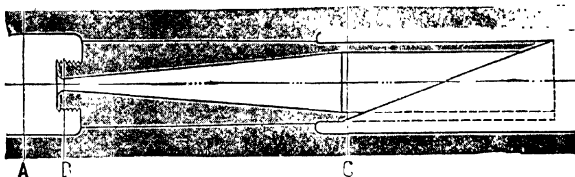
SECTION OF THE DE LAVAL STEAM NOZZLE.
